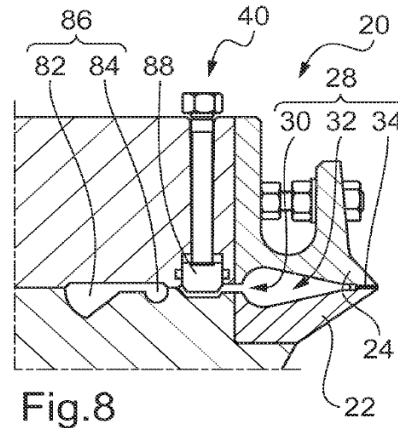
is a cross-sectional view of a gluing nozzle comprising an embodiment of the claimed invention. Spec. 6.
